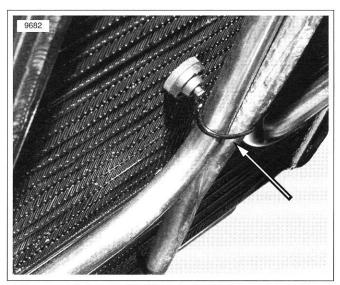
Lower Oil Pipes to Drain Hose Cable Wrap
